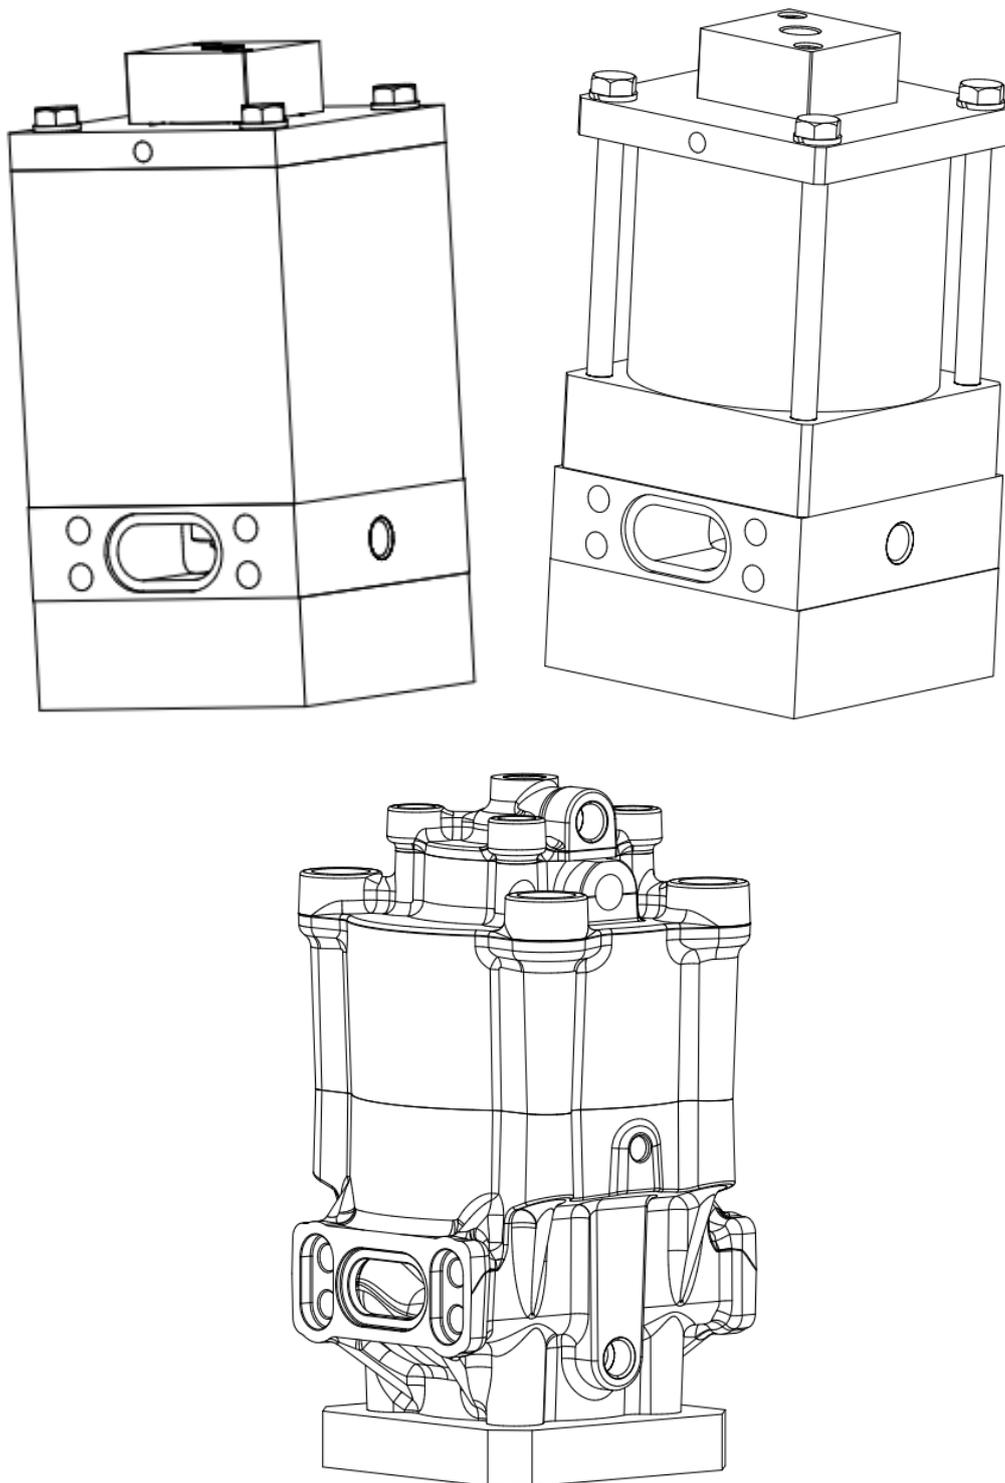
CO 3 way pneumatic valve size 1" ½ (see Section 12 for details about pneumatic connection)
